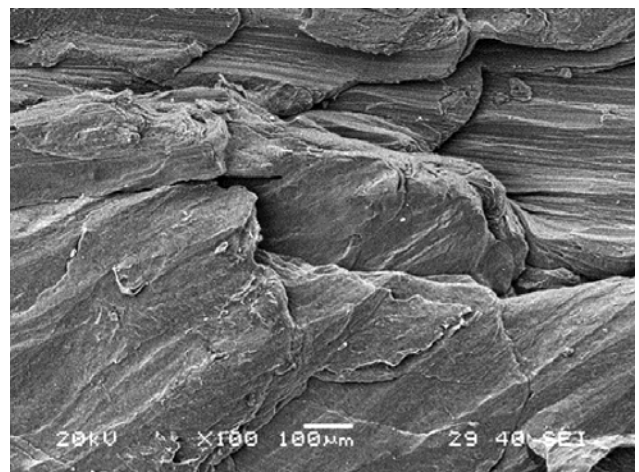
Magnified view of area 3 in weld 16.
